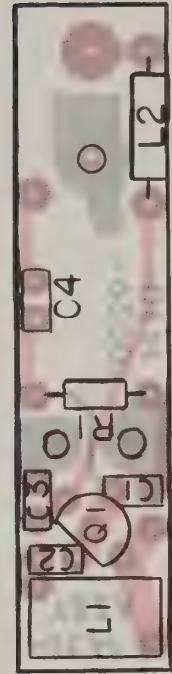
UHF Mixer Board Assembly A1, Component Location Diagram
